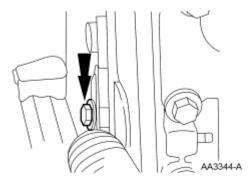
Engine Block Drain Plug Courtesy of FORD MOTOR CO.
